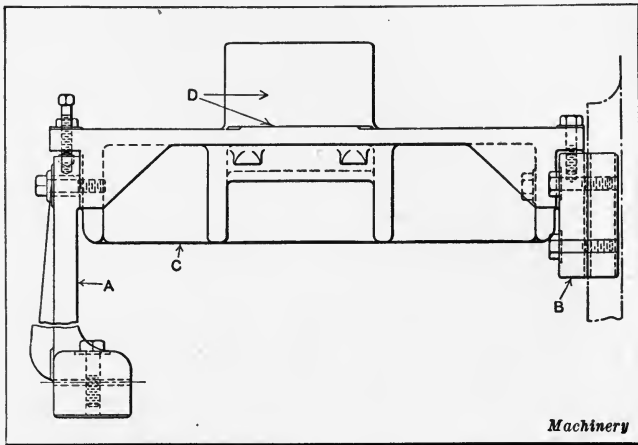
Assembled View of Parts clamped on Milling Machine to support the Auxiliary Cutting Head
